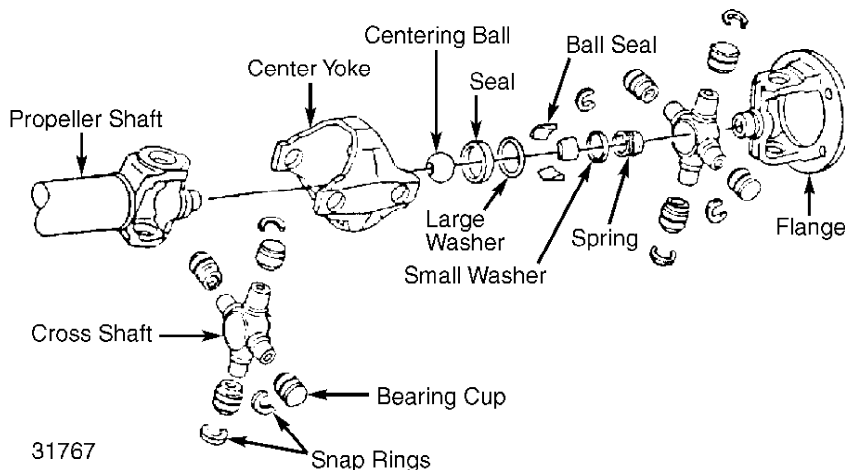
Exploded View of Jeep Constant Velocity Type Universal Joint
